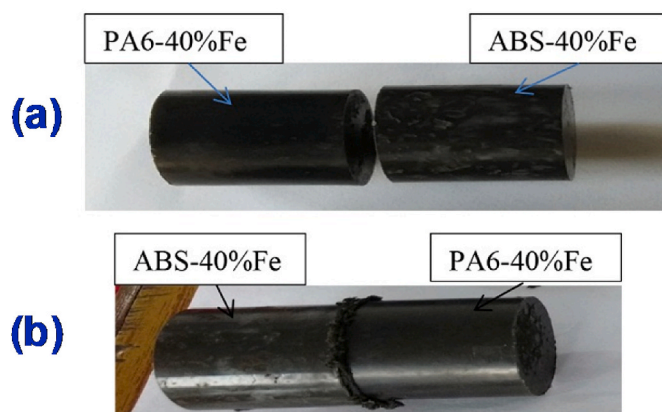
(a) FDM fabricated parts of ABS-40%Fe and PA6-40%Fe. (b) Frictionally welded parts. Reprinted with permission from Ref. [29].
